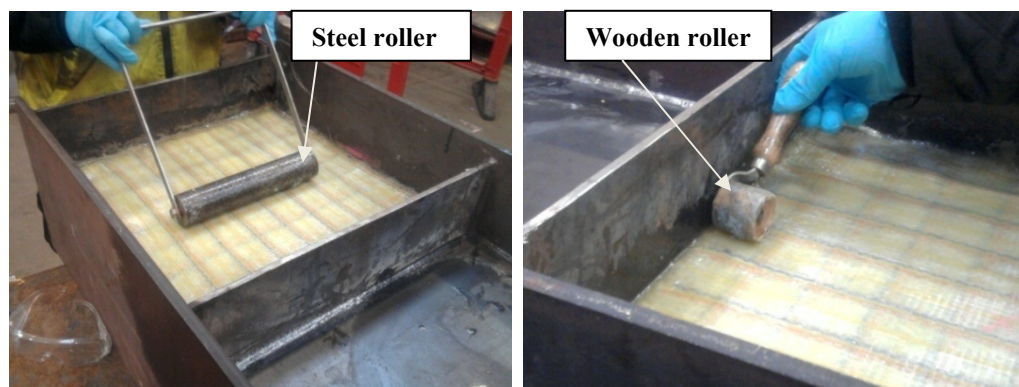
Compressing bonded layers of fabric sheets with steel and wooden rollers
